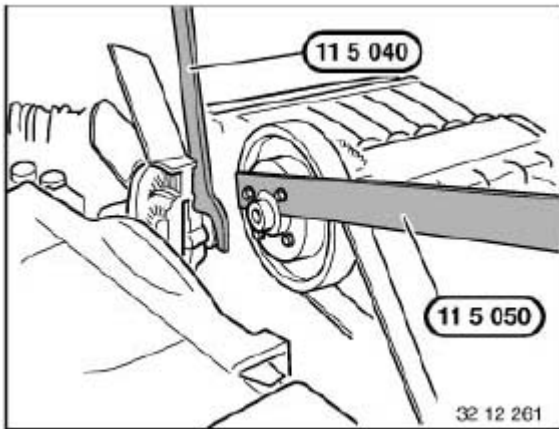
Identifying Special Tool (11 5 050 And 11 5 040) On Water Pump
